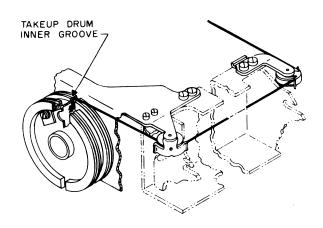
Return Cable Installation, Cable Threading Diagram
